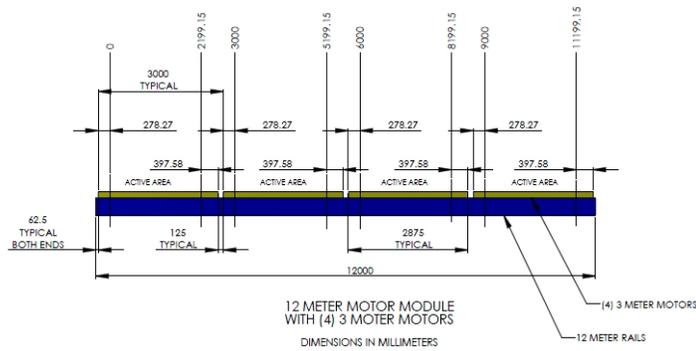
One standard 12m-long motor module with four 3 m motor windings.
